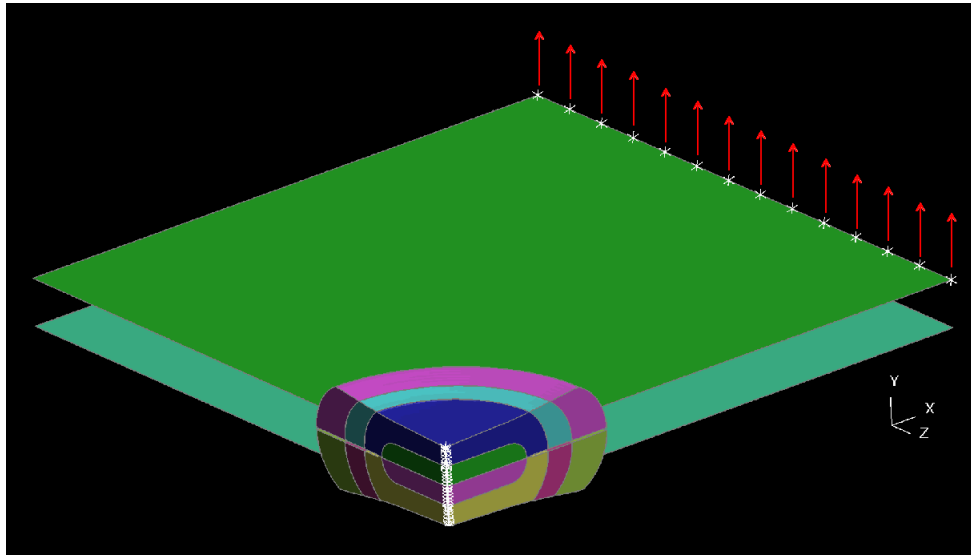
Cross tension model, indicating loading and weld edge boundary conditions
